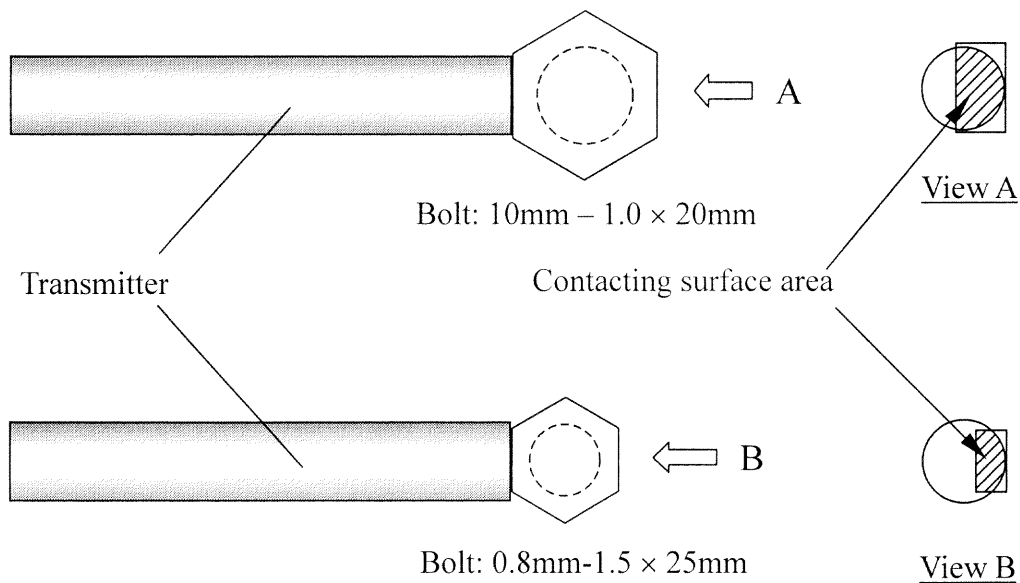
Contacting surface area is reduced in half with smaller bolt head.
